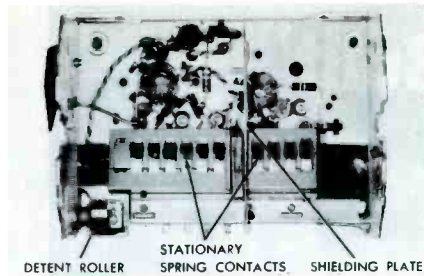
Bottom View of T-Series Tuner With Turret Removed.
